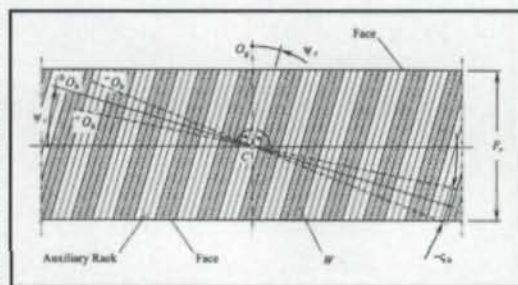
Front view on the auxiliary phantom rack R of an involute hob (see Fig. 5).
